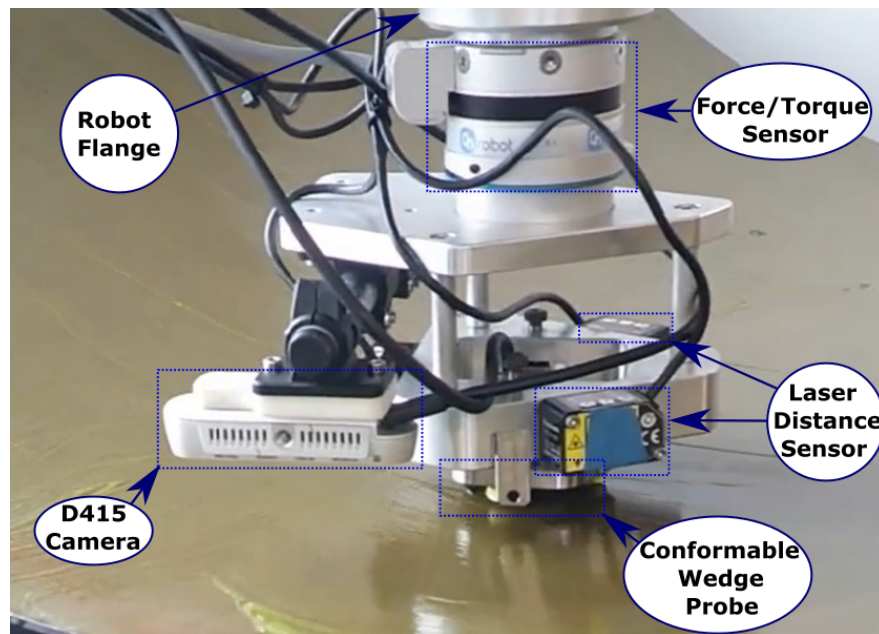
The experimental tool, mounting the laser-sensors, force/torque sensor, D415 camera, and CW probe to the robot's flange.
